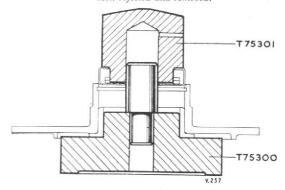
Pressing a replacement seal into the bottom cover of the starter adapter
